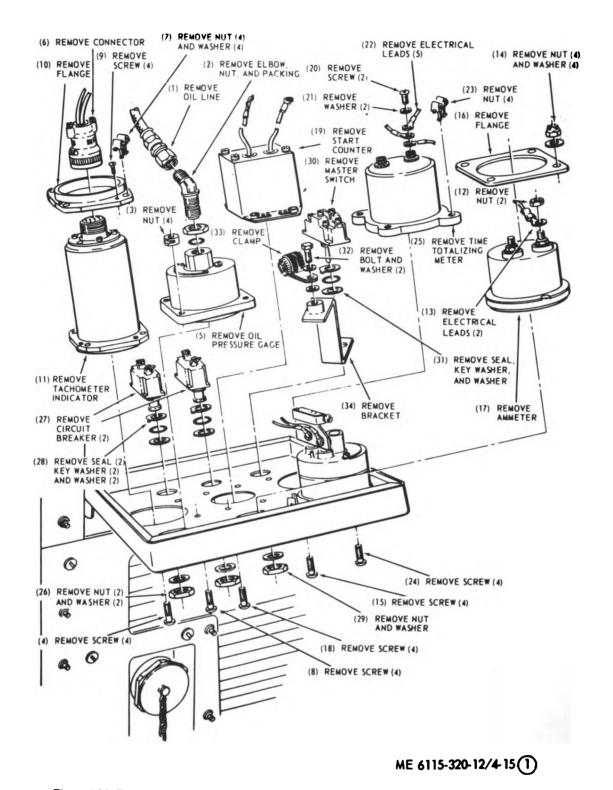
Engine controls instruments panel assembly components, removal and installation (Sheet 1 of 2)
